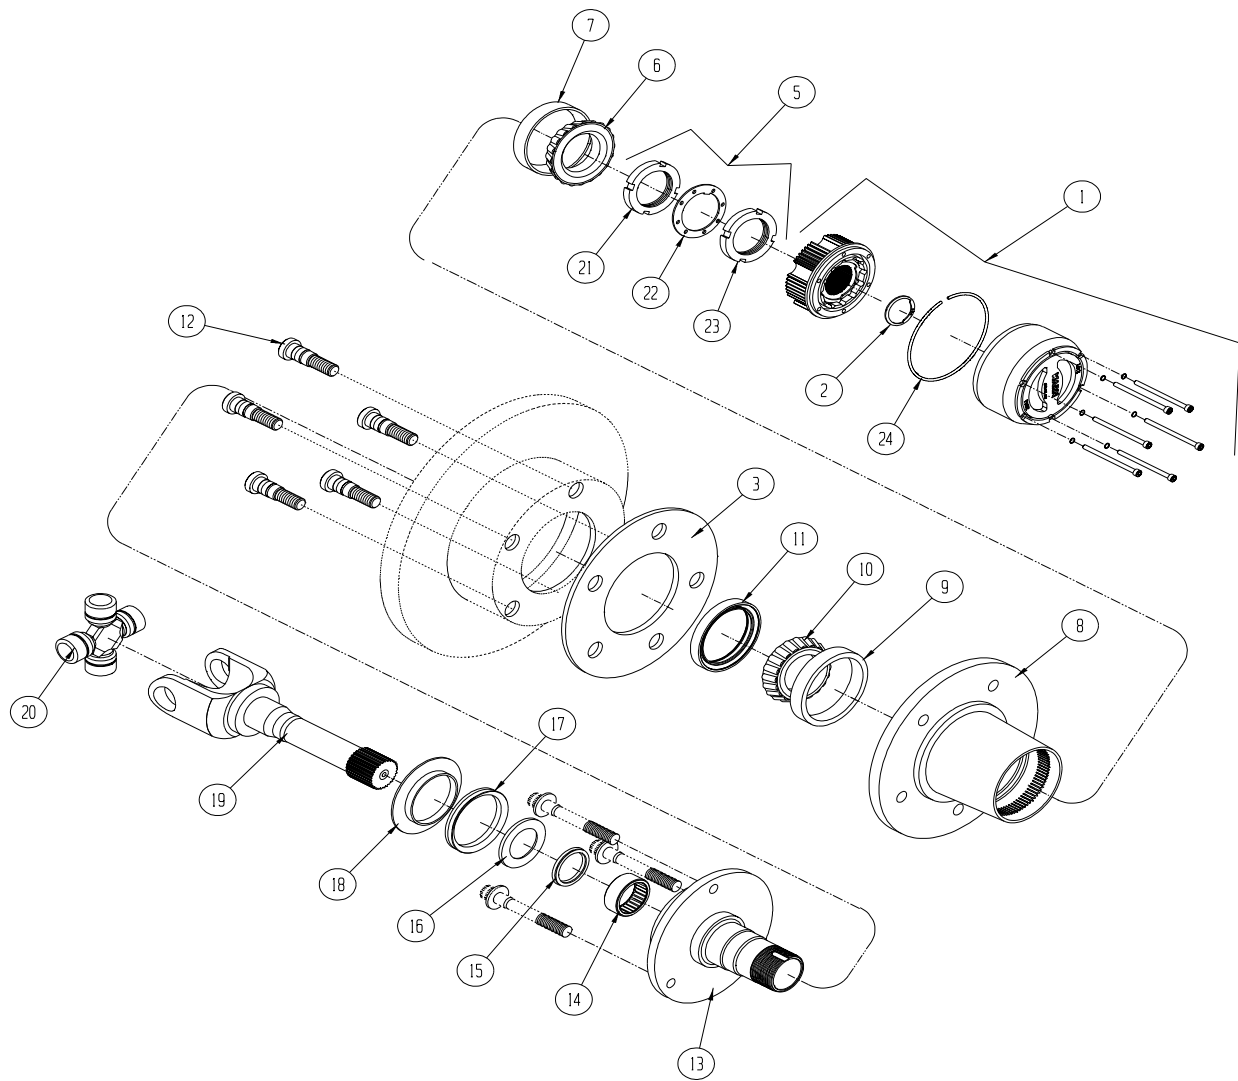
Front axle wheel hub conversion kit. Parts not included in kit are drawn with dashed lines
